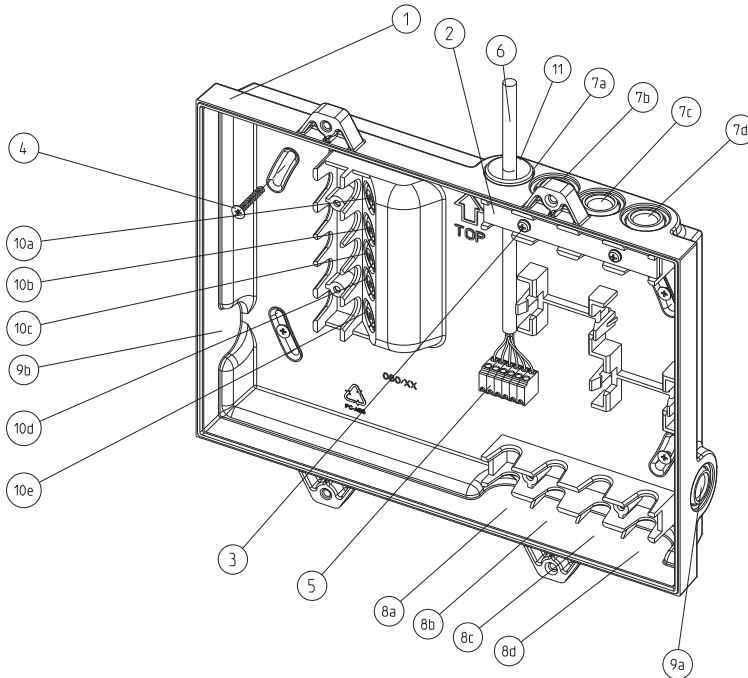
Inside View of Deep Back Cover Mounting Kit - To be mounted with zonal display
